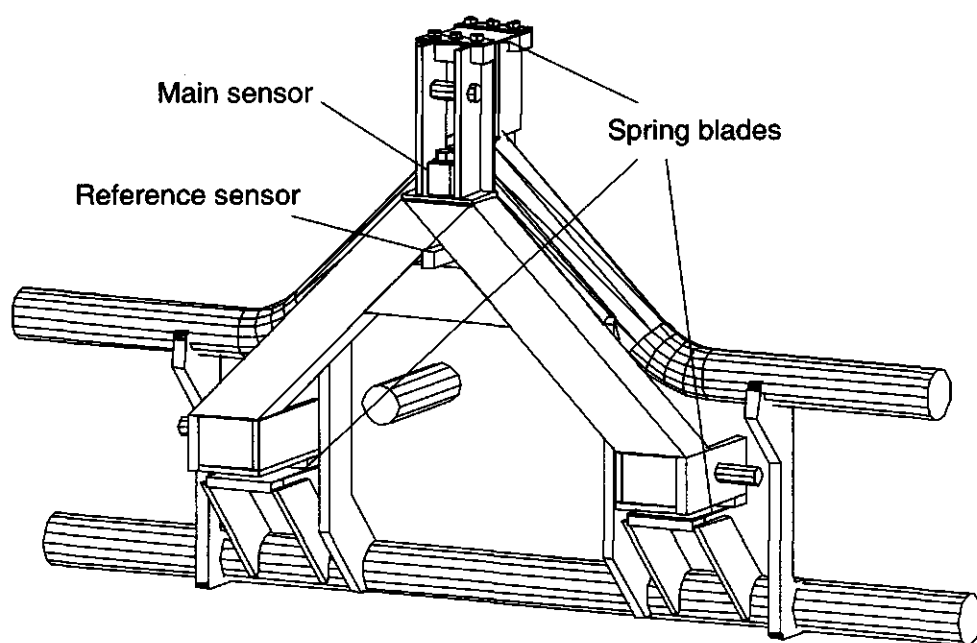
Construction view of weighing subframe in front of spreader assembly
